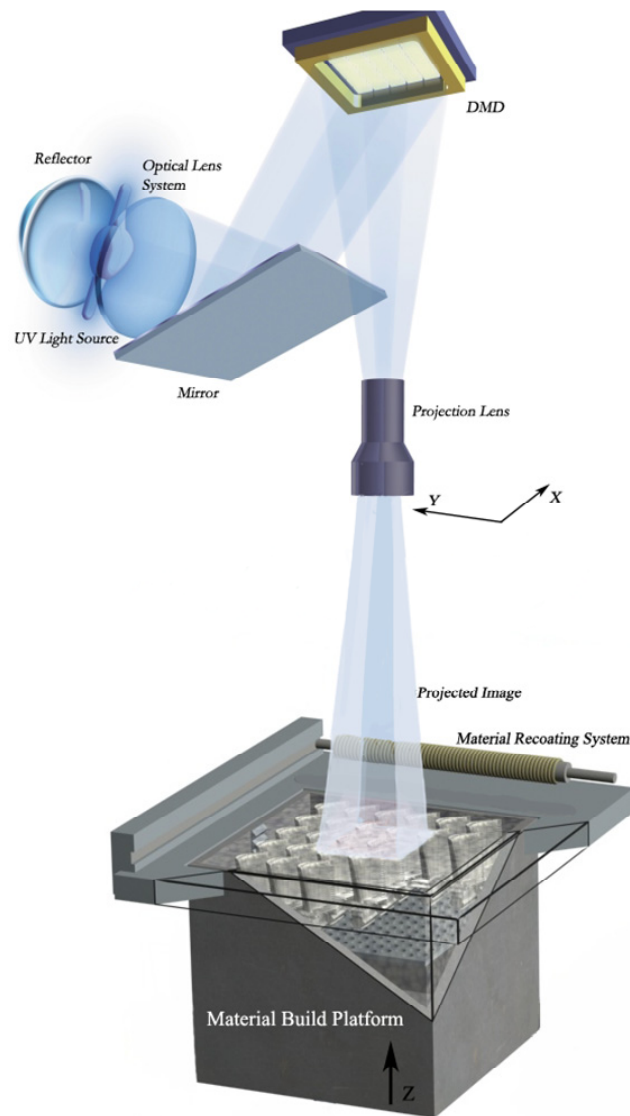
Schematic illustration of Georgia Tech's LAMP machine.
